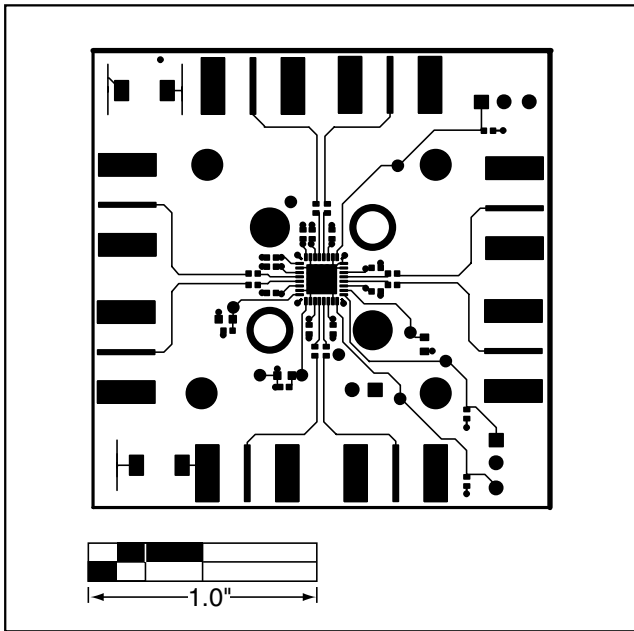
MAX3800UGJ EV Kit PC Board Layout—Component Side
